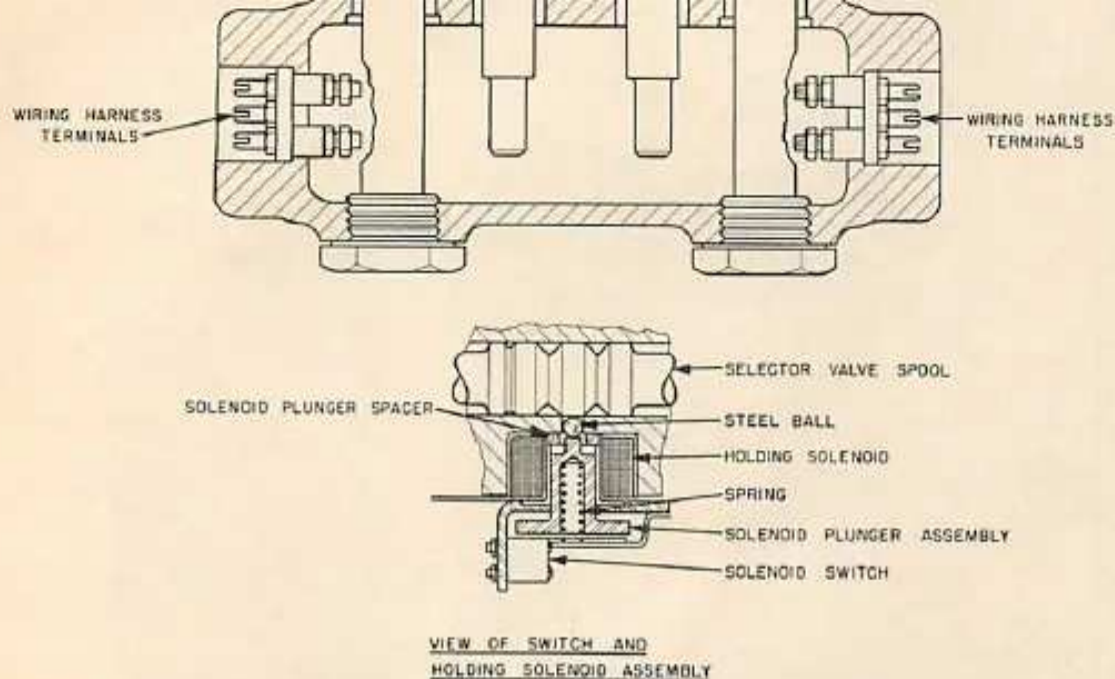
Cross-sectional view of Hydra-Lectric control unit and the solenoid holding switch assembly. Refer to Fig. O159 for exploded view of the unit.
